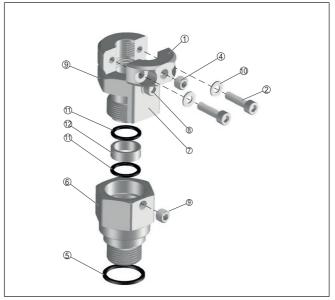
Lock fitting ARV-ECL.2 - up to 25 bar (362 psig)
